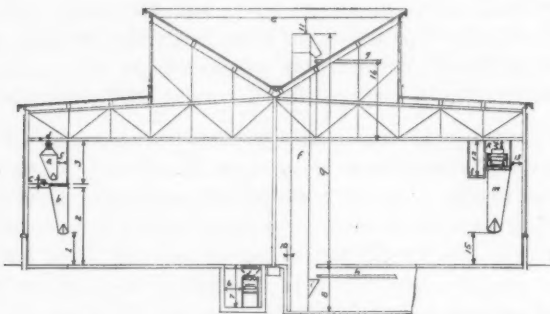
a*, CUPOLA; *b*, CHARGING MACHINE; *c*, BUCKET ON CHARGING MACHINE; *d*, HATCH IN CHARGING FLOOR THROUGH WHICH TO HOIST BUCKET.
